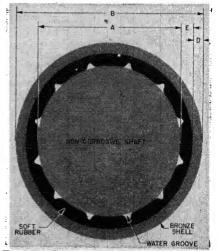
Cross section of a full-molded type of rubber bearing. A, shaft diameter. B, outside diameter. D, metal-wall thickness. E, rubber-wall thickness.
